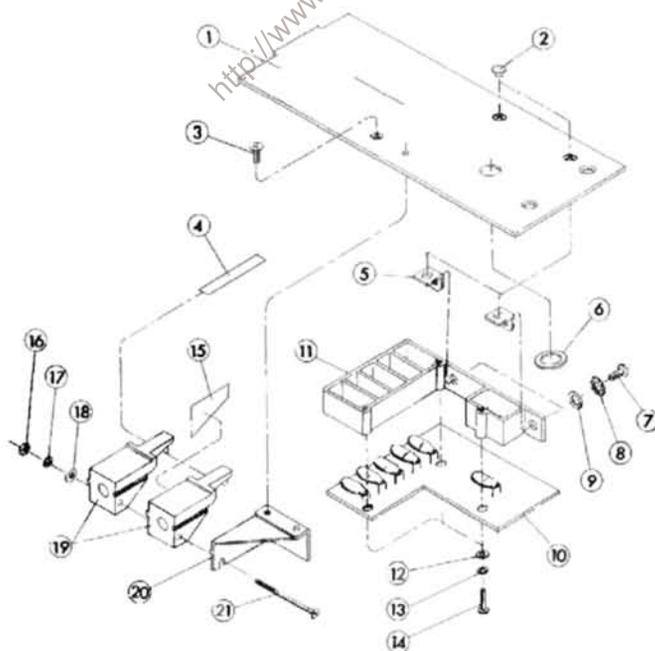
Exploded View of Frequency Multiplier, Over Limit Indicator, and Frequency Scale Indicator
